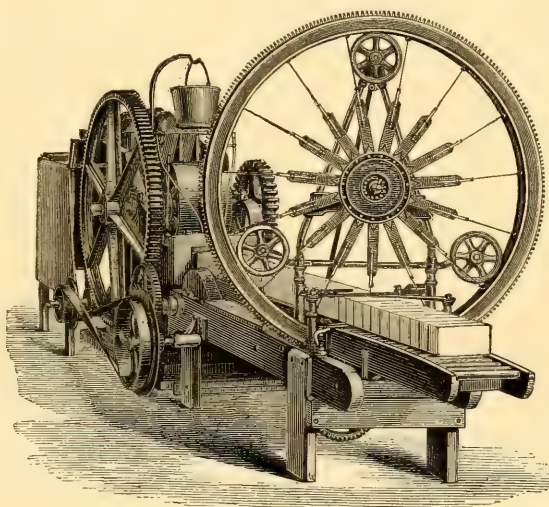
PINFOLD'S TILE-MAKING MACHINE.
